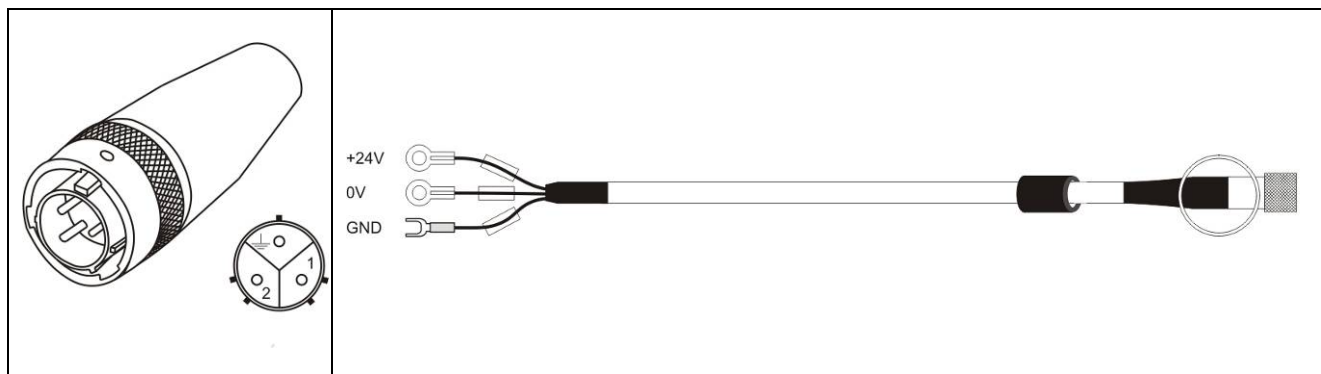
Male plug connector cod. UTG6103PNVDE (front view) and wiring.
